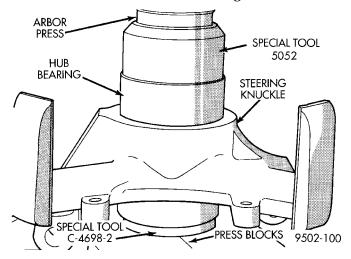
Pressing Hub Bearing Into Steering Knuckle CAUTION: When installing the retaining snap ring for the hub bearing care must be taken not to damage seal on new hub bearing.
